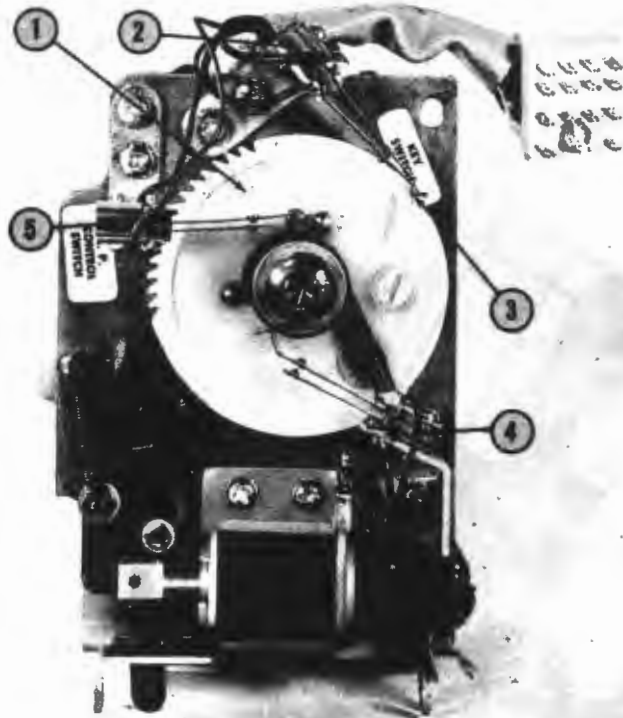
WALL BOX PLAYRAK ADJUSTMENT
